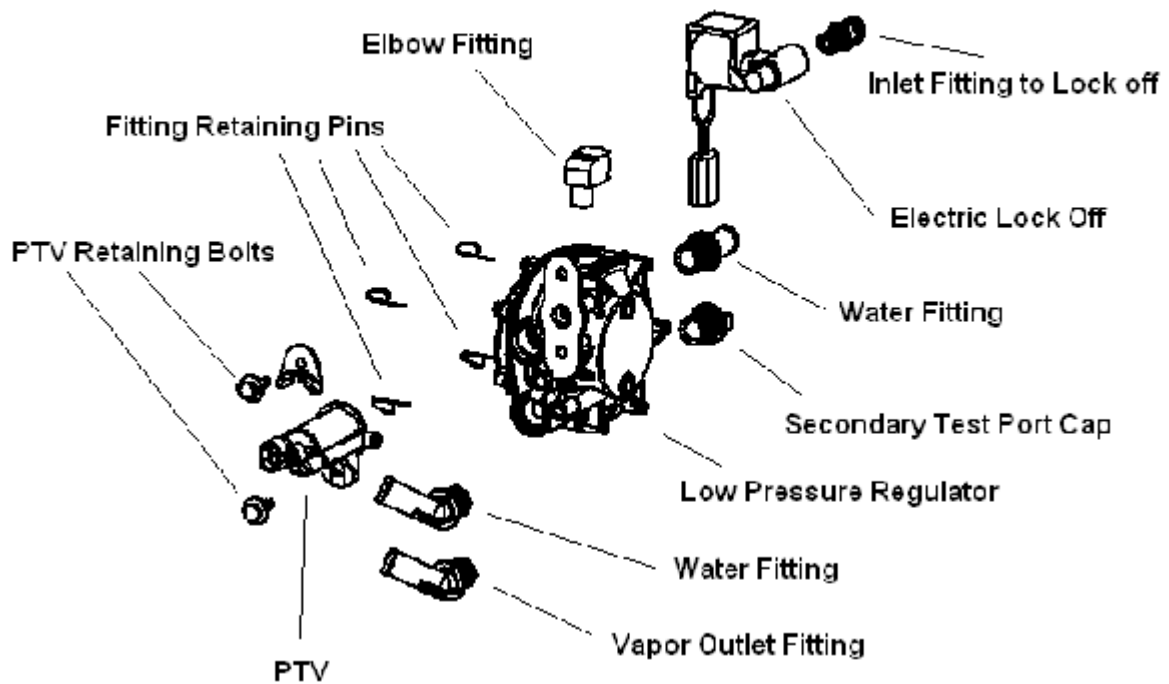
LOW PRESSURE REGULATOR AND LOCK OFF ASSEMBLY
